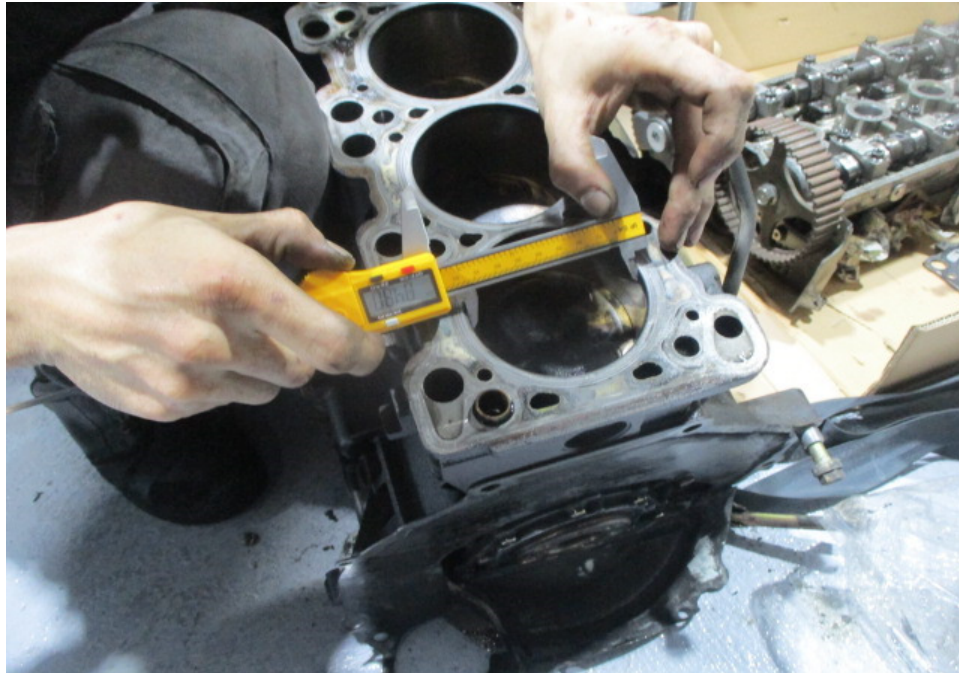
shows measurement being carried out to the bore of cylinder 4 of the Mitsubishi engine. The bore and stroke measurements of the Mitsubishi engine were carried out using a digital Vernier Caliper that was calibrated before the start of the measurements.
